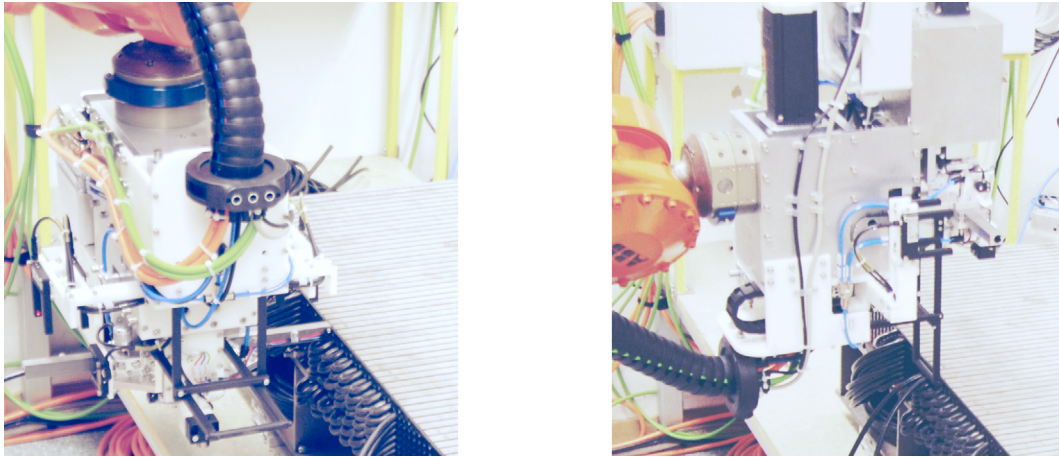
(a) A close-up photo of R1 pulling the winding cable through a slot hole. (b) A close-up photo of R2 holding down an end winding being pulled by R1.
